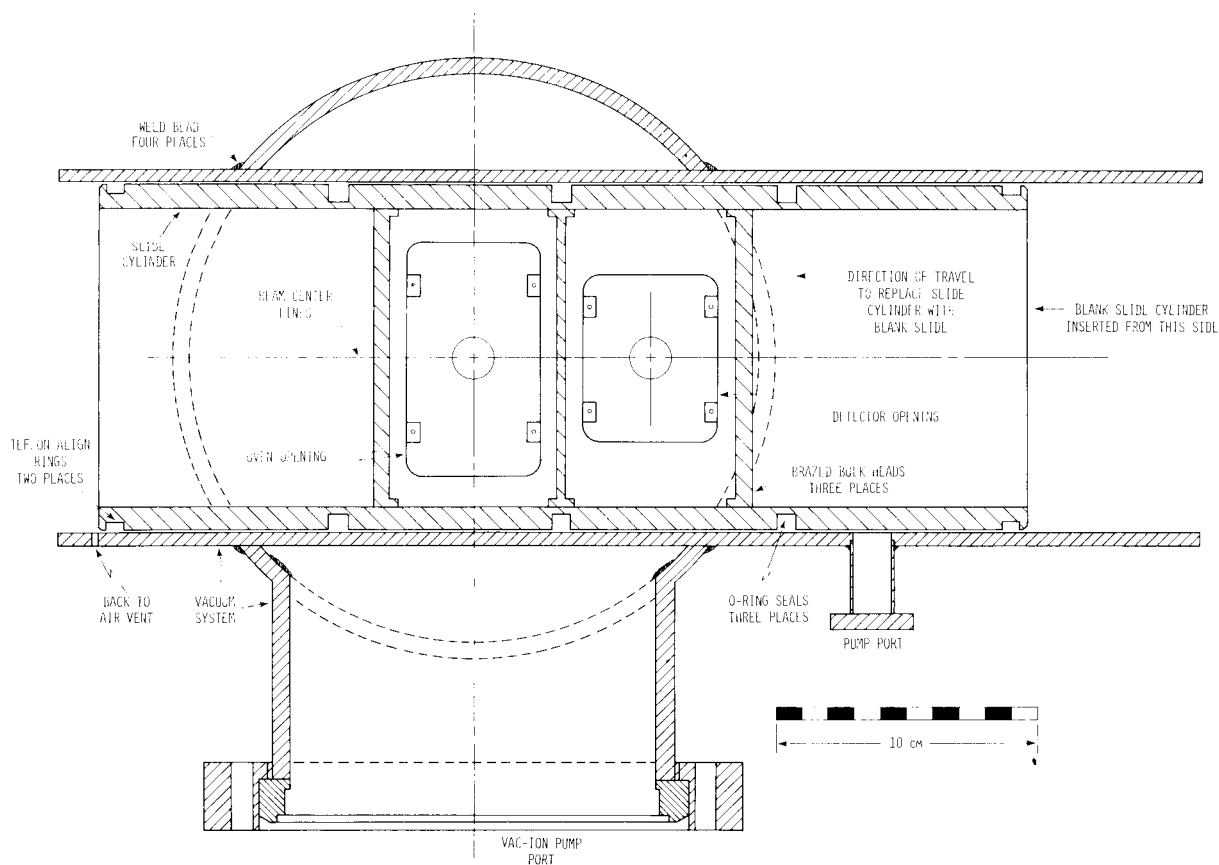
Cross-section drawing of one of the NBS-6 vacuum load-lock systems. Movable slide cylinder carrying oven and detector is shown in the oven position. The spacing between this cylinder and the outer stationary cylinder, part of the vacuum system, is maintained by two teflon guide rings and the rubber "O"-ring vacuum seals. The rings mount in the five grooves shown. The three rubber vacuum seals isolate the oven and detector chambers and prevent cesium transfer to undesired locations. The oven and detector assemblies are not shown.
